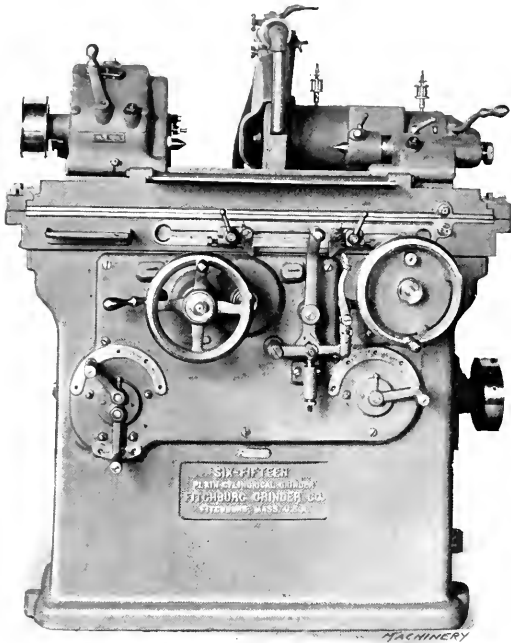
Front View of Fitchburg Style A Plain Grinding Machine
